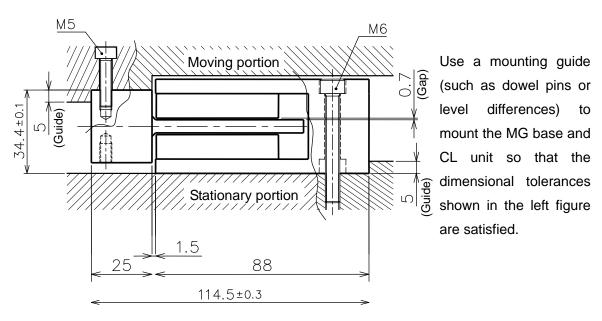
Mounting dimensions of the high-thrust type (side installation)
